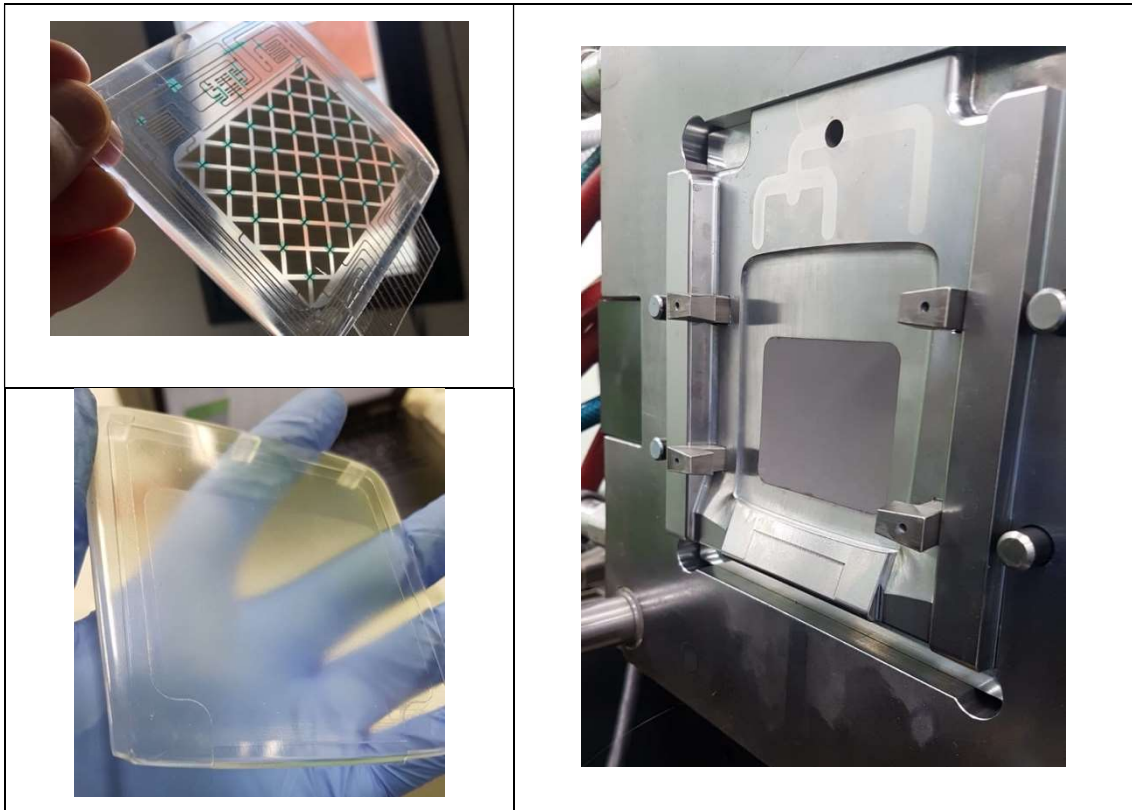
Image of the injection moulded part containing the IME electronically printed film, (above-left). Image of the injection mould used, showing the central microtextured part (right) and picture of the injection moulded part (below-left) without IME film, shown in perspective to highlight the presence of the microstructure. Picture courtesy of Walterpack PPT.
